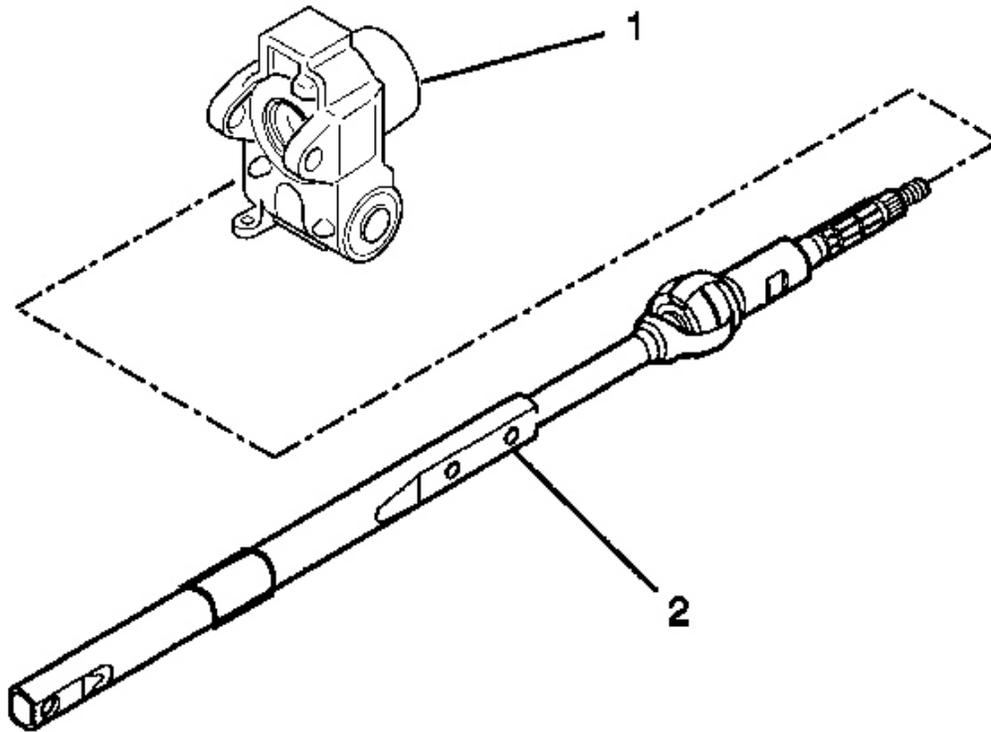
View Of Tilt Head Assembly, Steering Column Support Assembly & Steering Shaft (Power Tilt/Telescope, Floor Shift)
